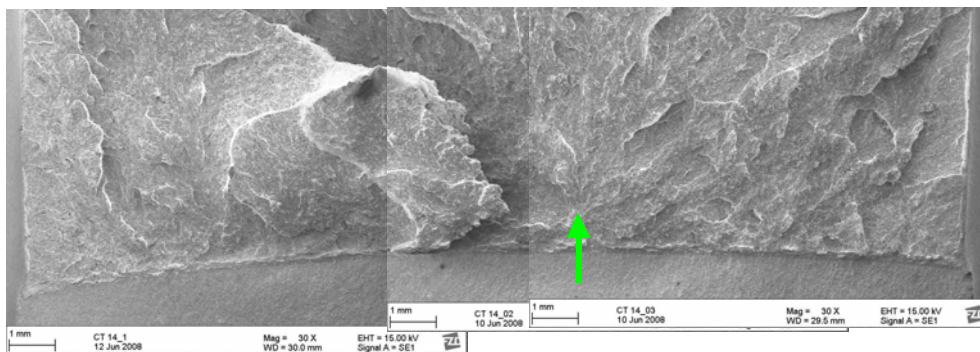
Fracture surface of specimen „CT14“, arrow indicating the crack initiation site.
